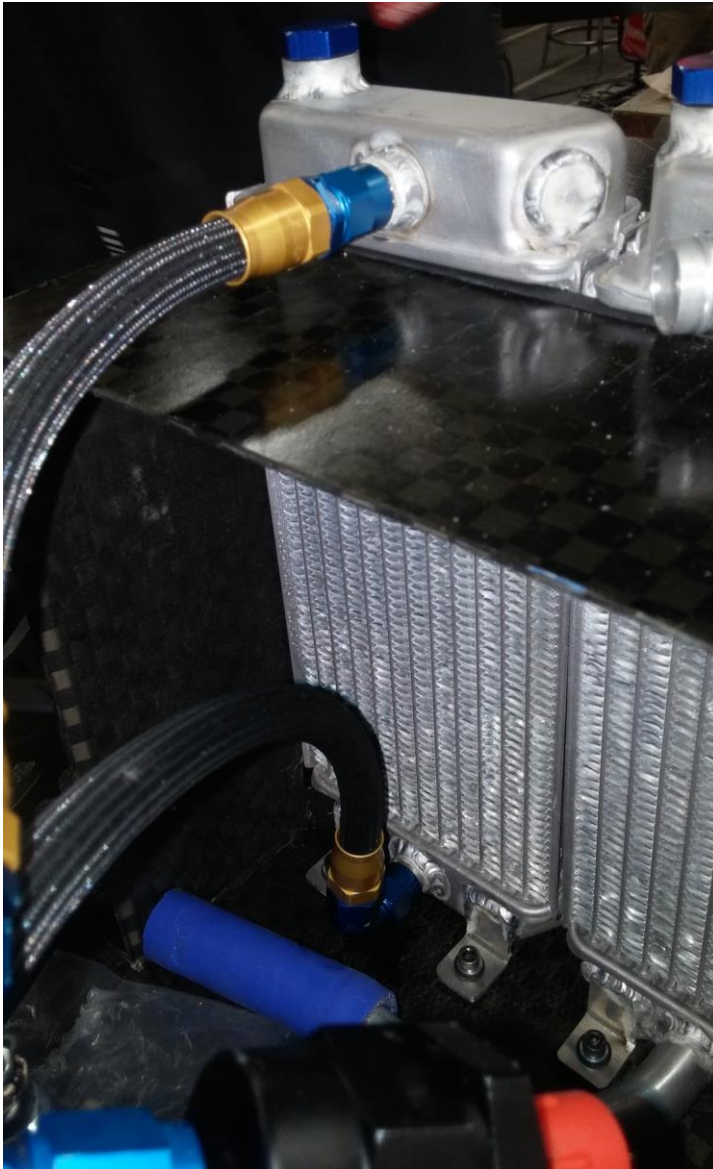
Completed and installed radiator (oil radiator). The ports on the radiator are weld in bungs.
